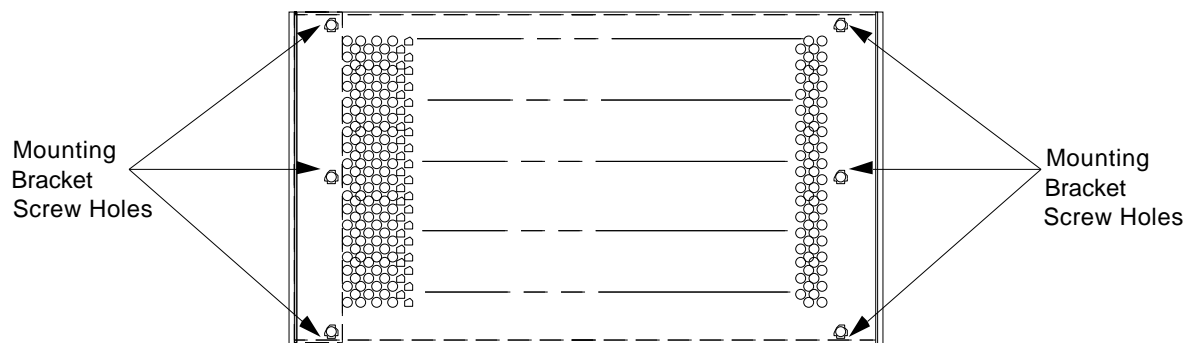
Side View of Network 9000 Hub, Showing Location of Bracket Holes.
